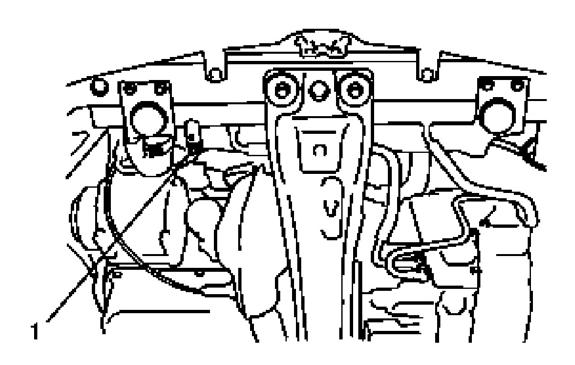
Identifying Radiator Drain Plug Courtesy of SUZUKI OF AMERICA CORP.
